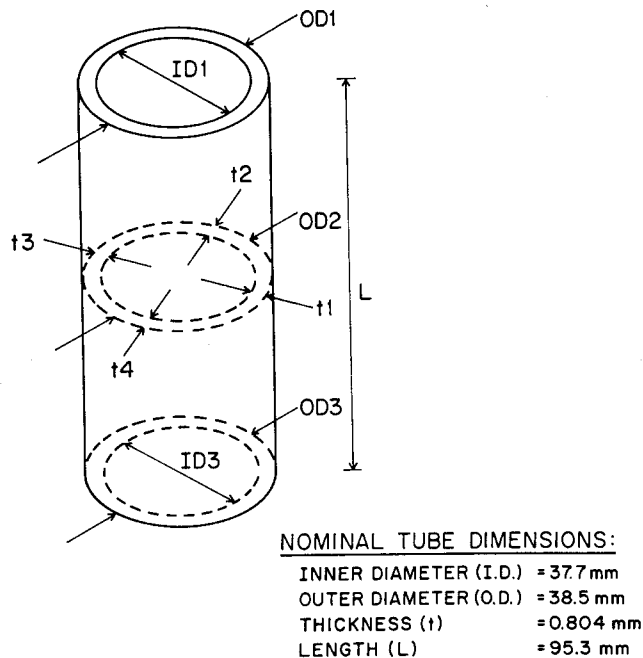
Specimen dimensions and measurement locations for inner and outer diameters, thicknesses, and length.
